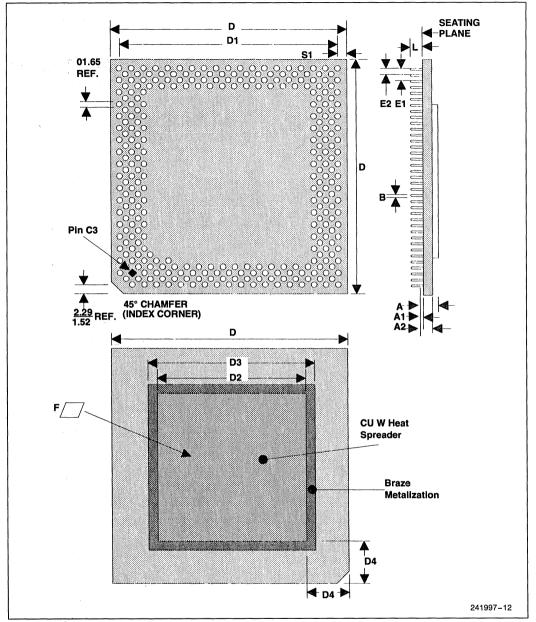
Pentium® Processor 75/90/100/120 Package Dimensions (with Spreader)
